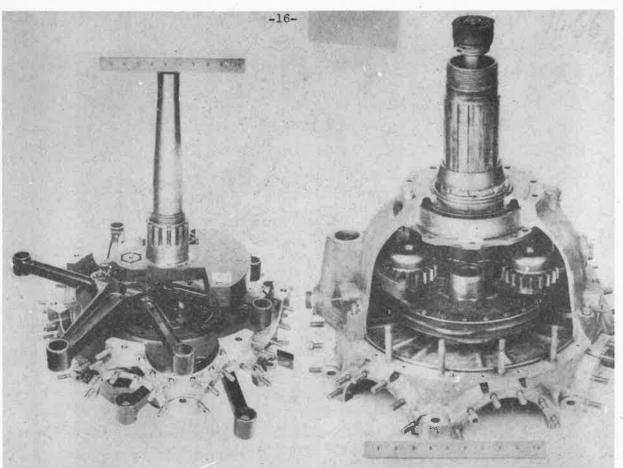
(CEE 20505) 332 Crankshaft, Crankcase, Master Rod, Articulated Rods, Counterweight, and Main Bearing.
